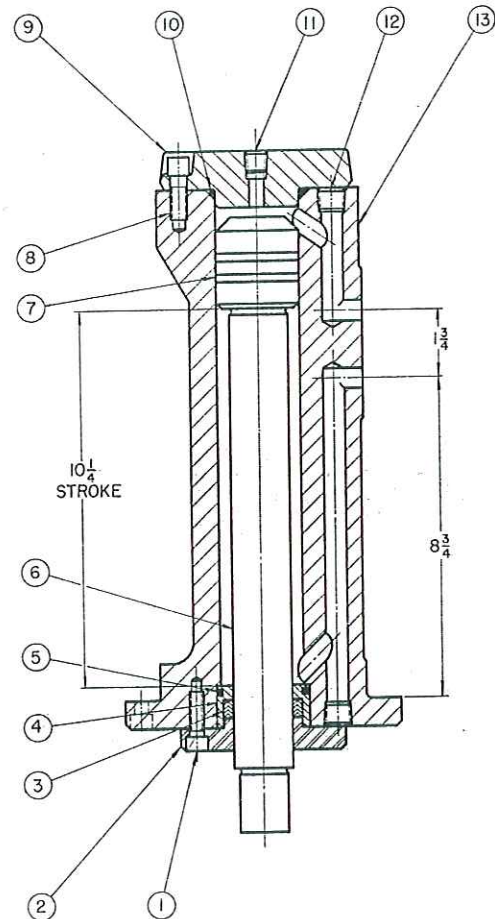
CROSS SECTION VIEW OF PACKING GLAND
